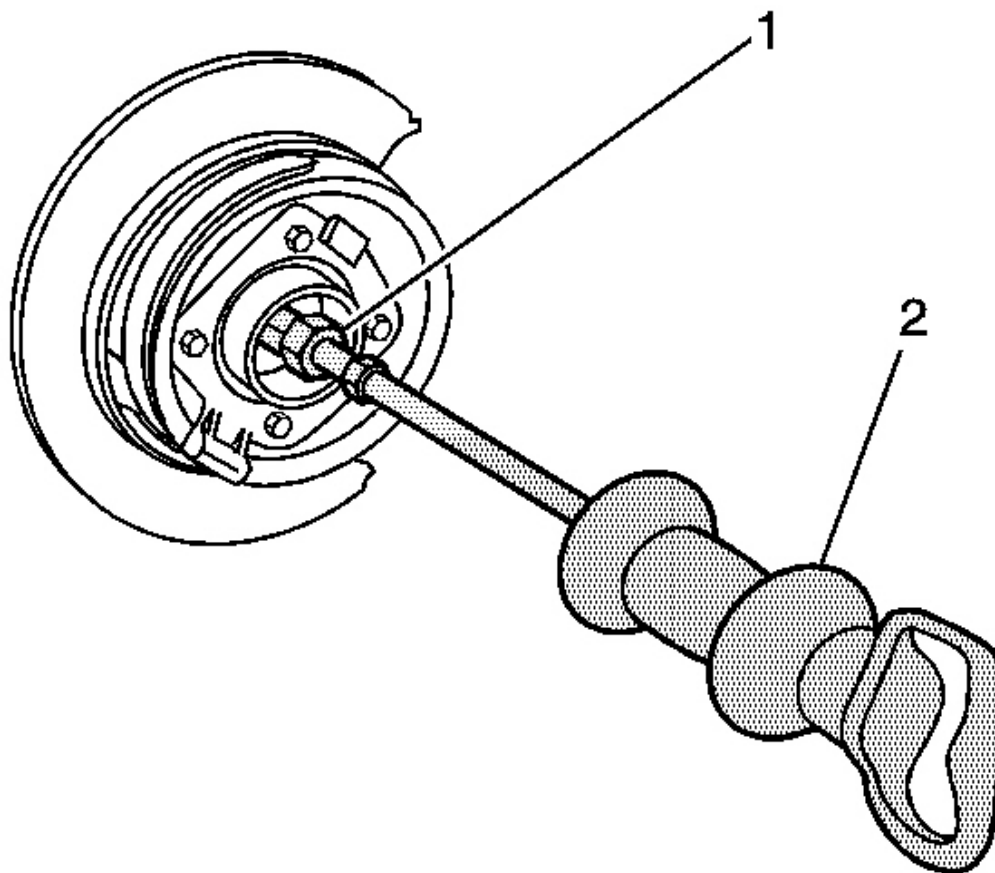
View Of Wheel Speed Sensor Ring, Axle Housing & Removal Tool
